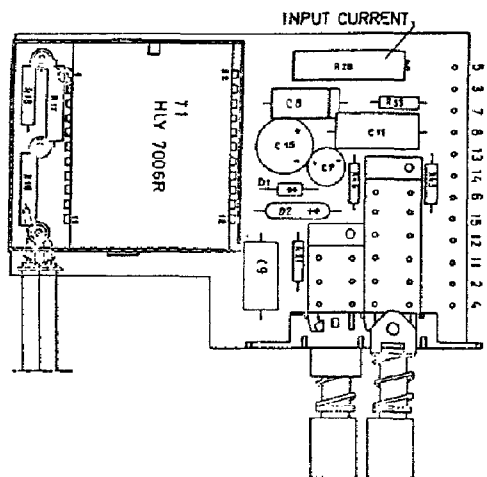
Amplifier PCB (B-31-2005) Layout.
